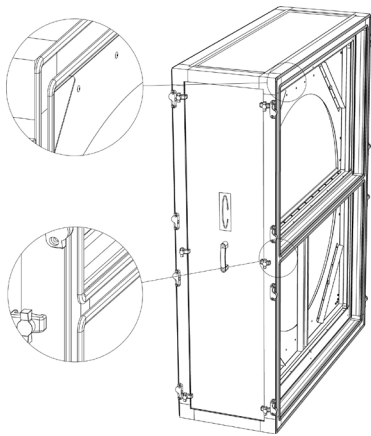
Sealing strip on double deck AmberAir section
